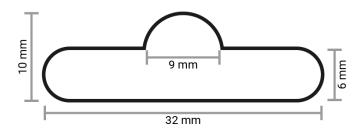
Euro hole dimensions in accordance with DIN EN 13010
